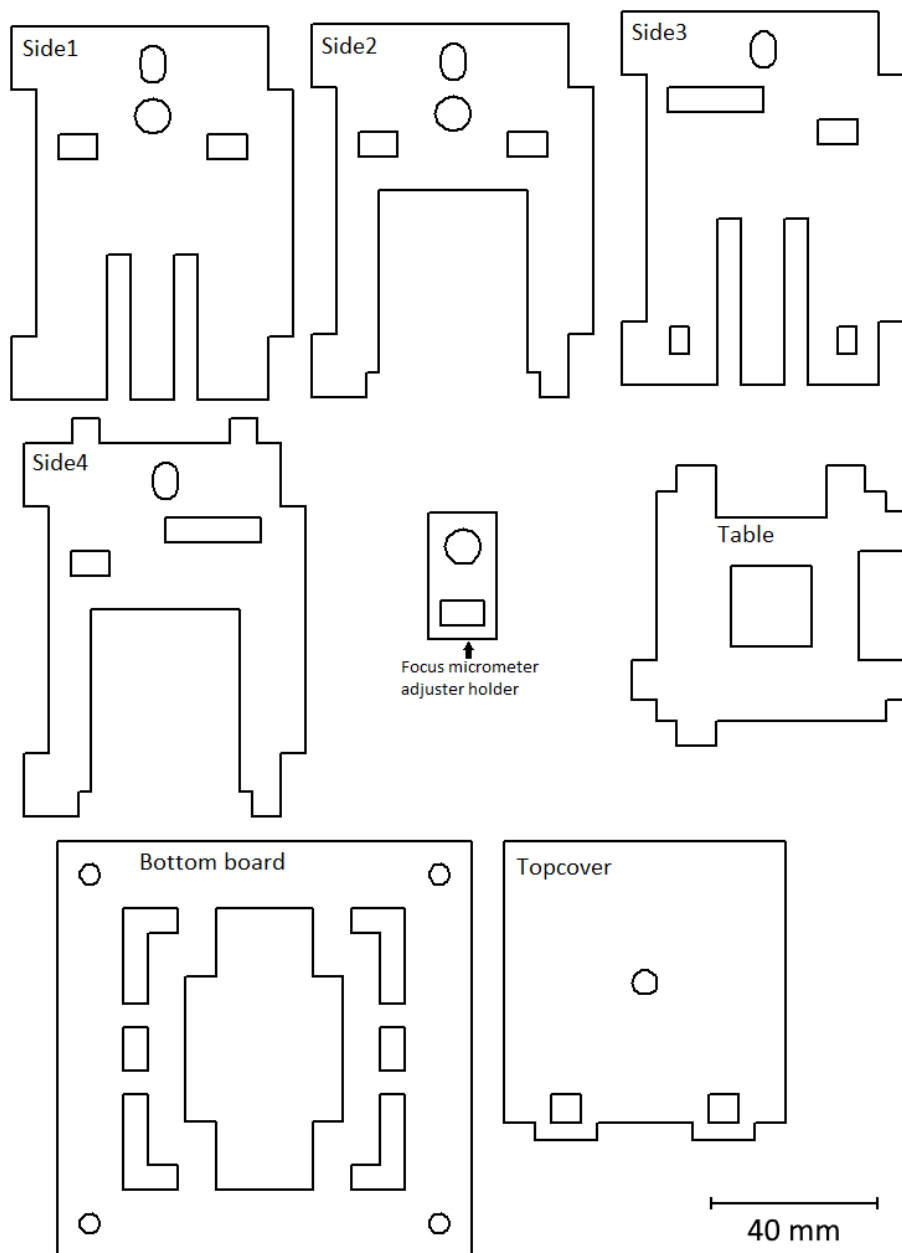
Laser-cuttable 2D design. Three of the sides in the top row. The fourth side, focus micrometer adjuster holder and sample holder table in the middle row. And the bottom board and top cover in the bottom row.
